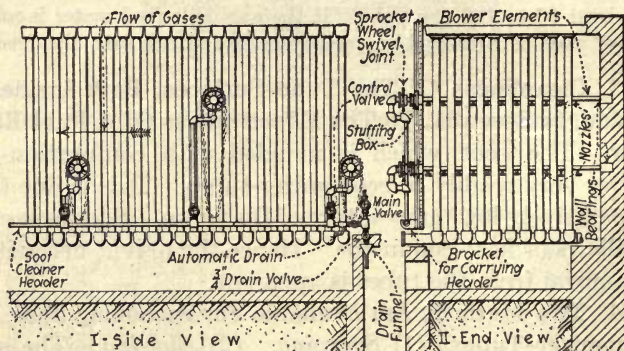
"Green" Fuel-Economizer Equipped With Vulcan Soot Blowers.
